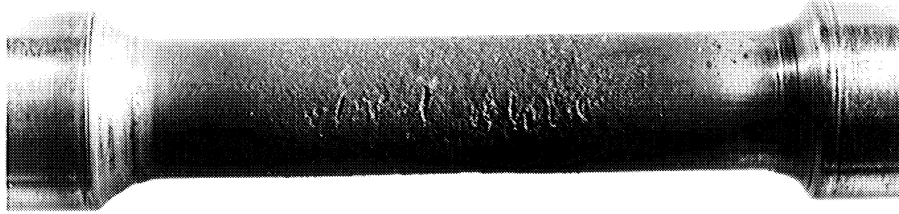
Thermal-Shock Specimen of Round Cross Section, Showing Grooves after Test; Type 347 Stainless Steel.
